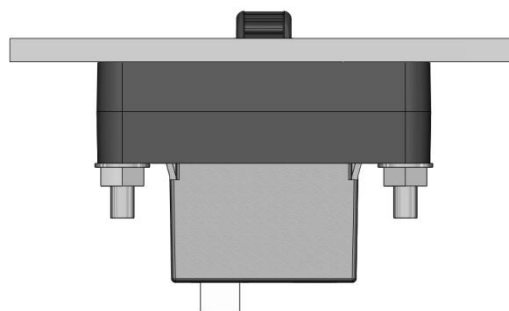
Front view of scroll wheel module installed into the rear of a panel
